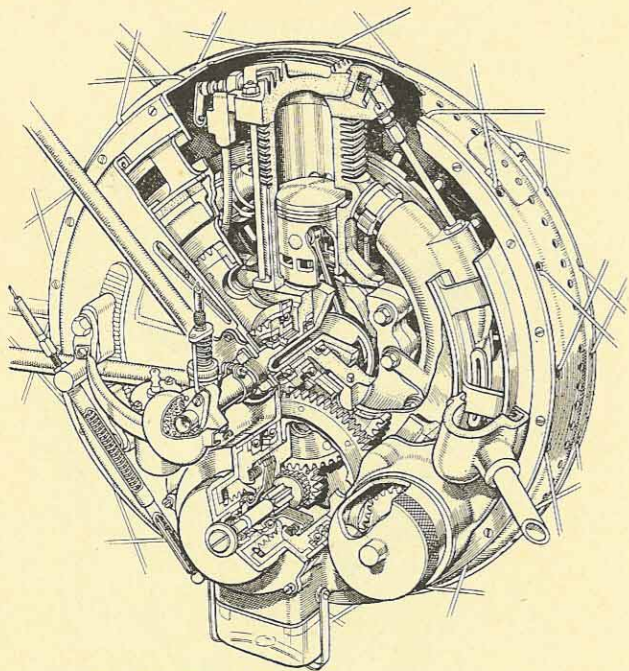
The T.I. Power Wheel is a 40 c.c., two-stroke rotary engine which spins around a fixed crankshaft (the wheel spindle) and is contained within the drum of the wheel hub. Gear transmission and a five-plate clutch are employed. The design incorporates, among many ingenious features, a rotary inlet valve actuated by the connecting-rod, magneto ignition, a separate gear-driven alternator for lighting, and an internal-expanding brake. Cooling is automatic—the rotating engine acts virtually as the impeller of a centrifugal pump
